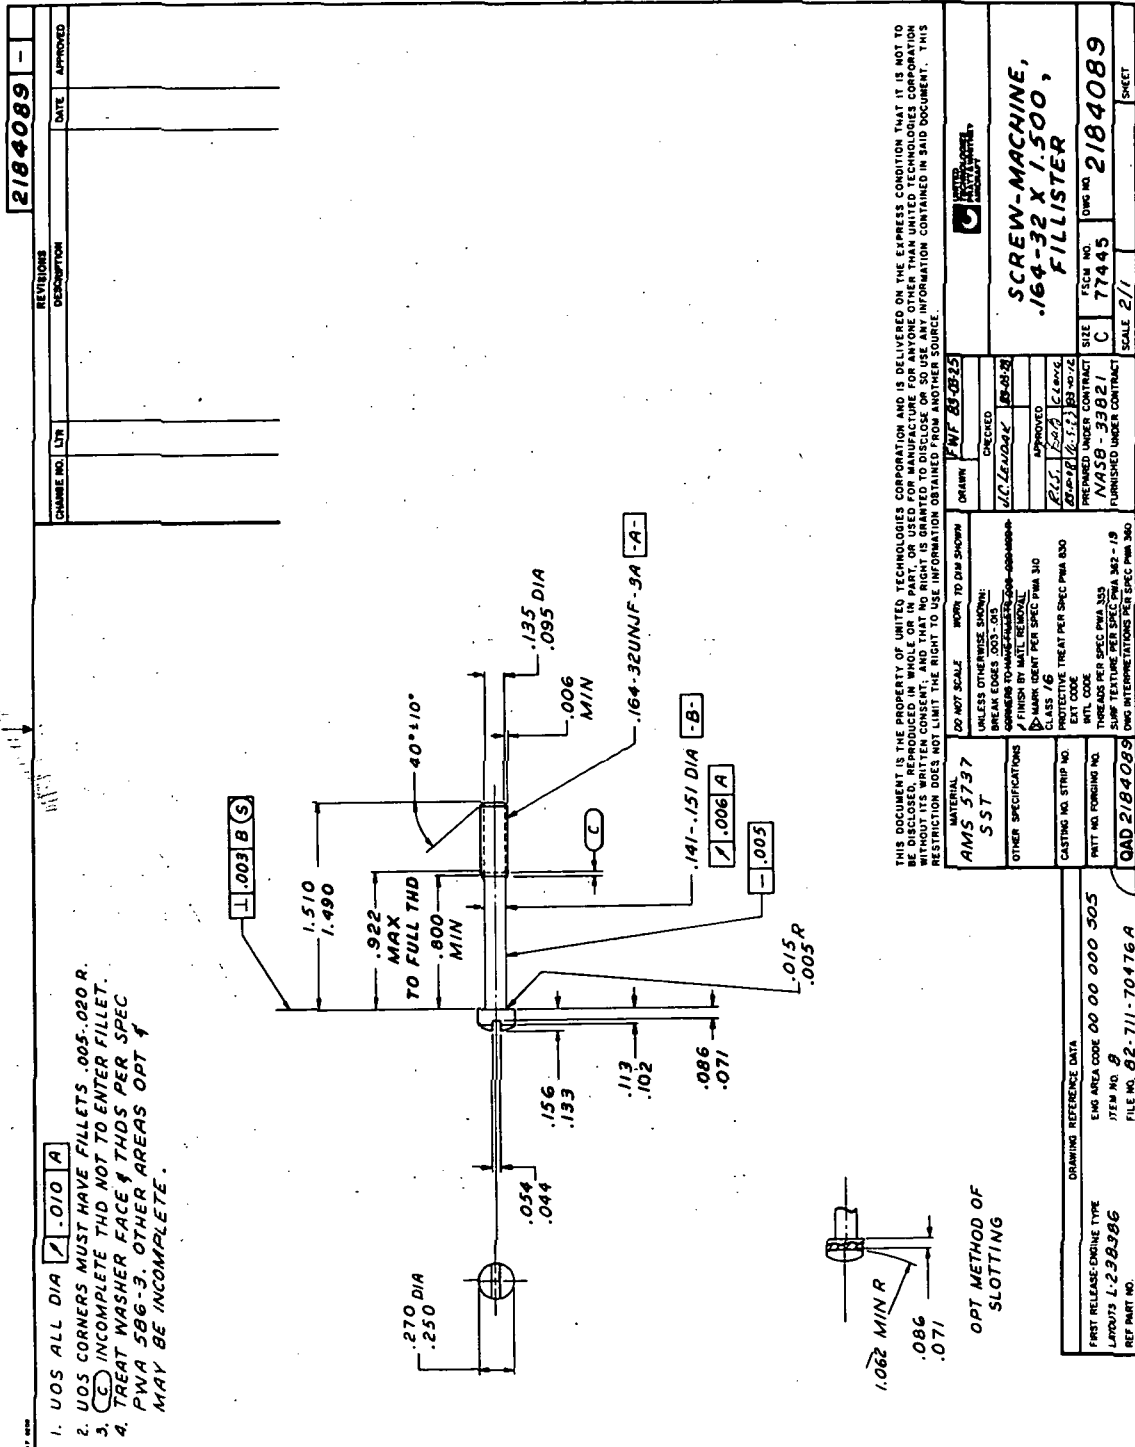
Detail Parts Drawing — Machine Screw (Reduction of Original, Not to Scale)
